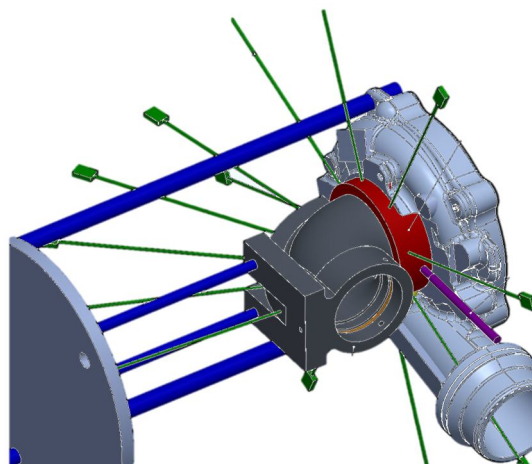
CAD model of the compressor assembly, such as the temperature and pressure instruments, as well as the mounting system, with the 0.75D elbow intake attached to the common adapter.
